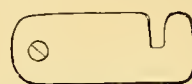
SLIP TO HOLD SIDE FLAP.
